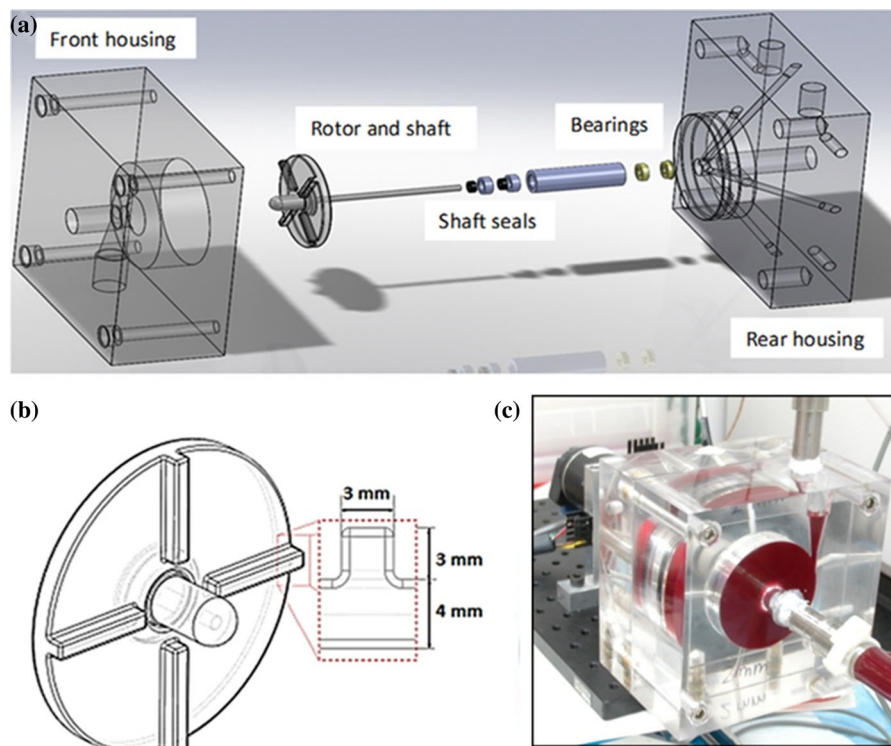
Images of the: (a) pump assembly, (b) impeller blade dimensions, and (c) physical model of the pump tested with animal blood.
